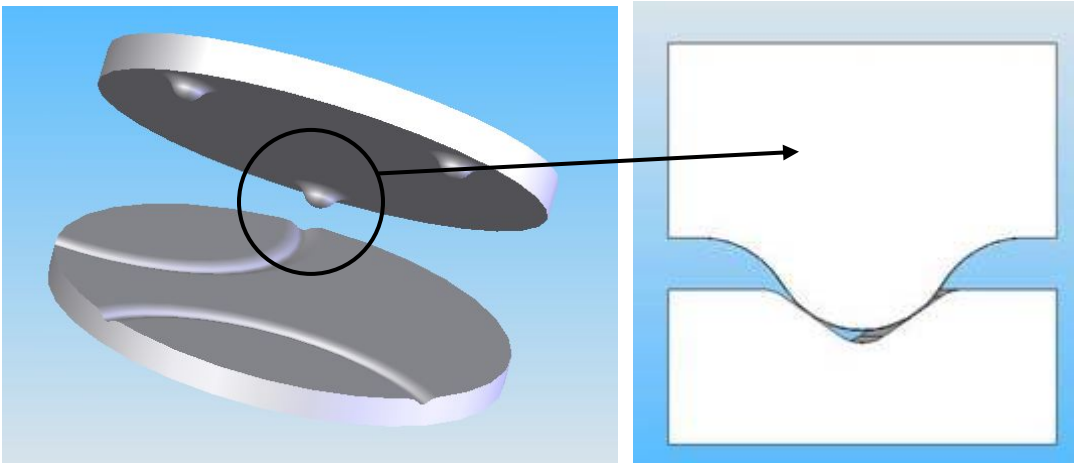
Schematic illustration of kinematic coupling on mirror blank top and telescope housing
